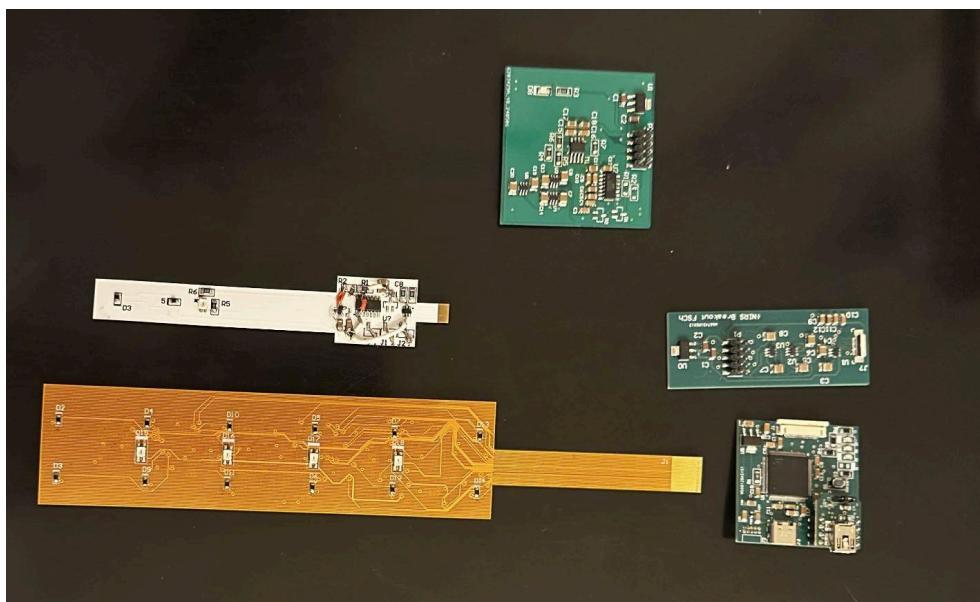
From top to bottom, left/right. The first single-channel prototype breakout board, single-channel flex-PCB, single-channel breakout board, multi-channel board, and MCU board.
